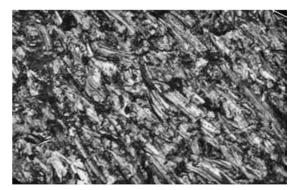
Machined Titanium surface using AWJ, (Zoom 20 x)
